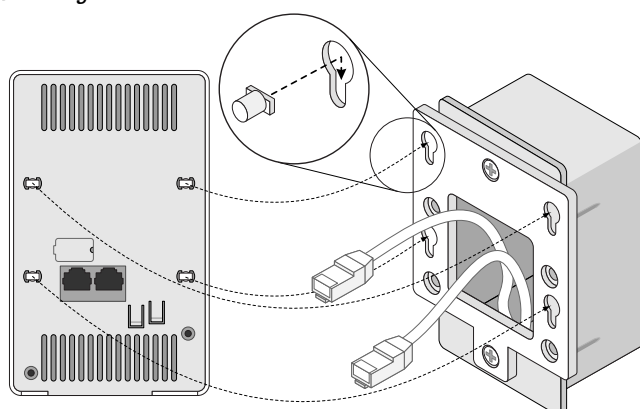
Bracket to Gang Box (Worldwide Single Gang Outlet Box Shown)
